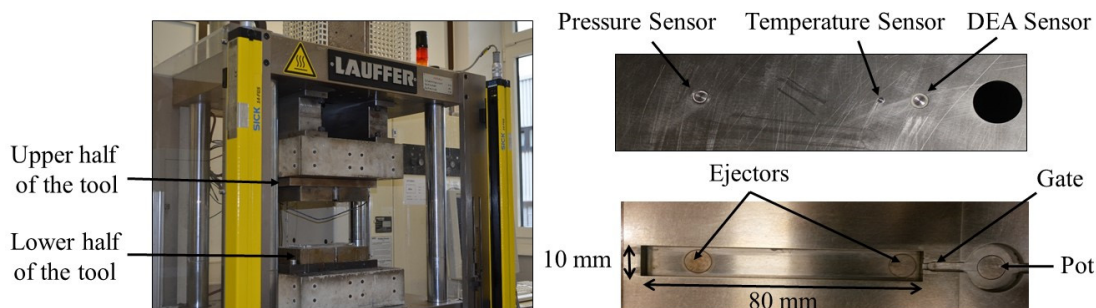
Transfer molding press to produce the sample bars (left), mold tool geometry for production of the sample bars (right)
